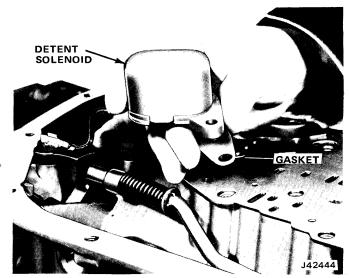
Removing—Installing Detent Solenoid and Gasket
